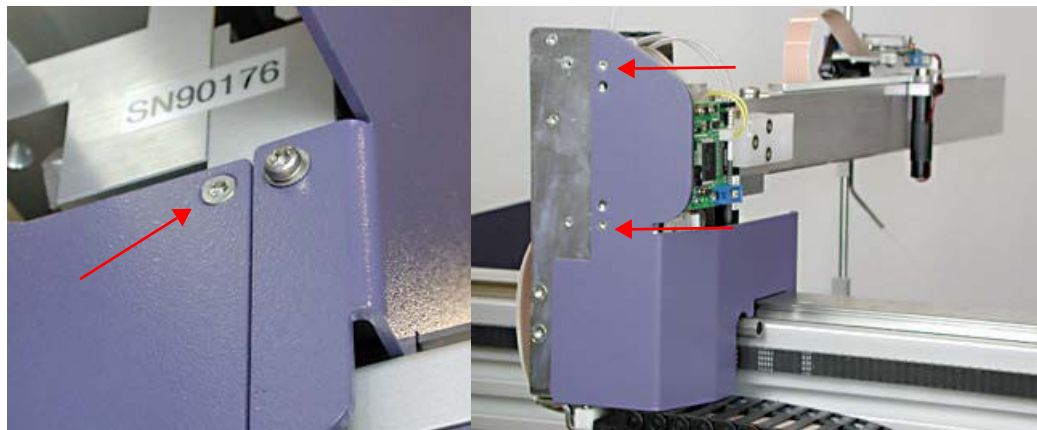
Screw on the Back Underneath the Arm and on the Rear Cover Plate
